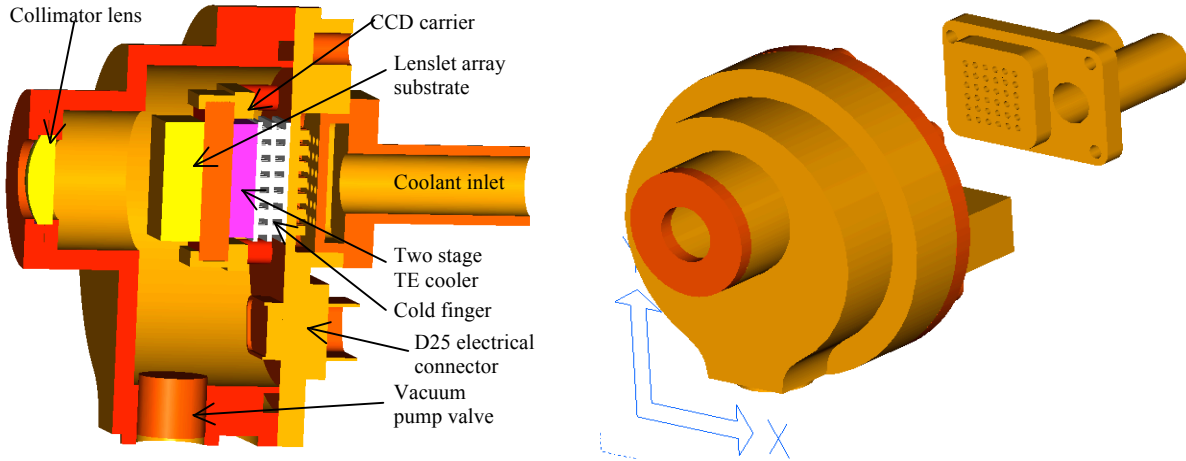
The CCD39 WFS head shown in section (*left*) and as a solid-body model (*right*) with the cooling plate removed. The diameter of the head at its widest is 75 mm.
